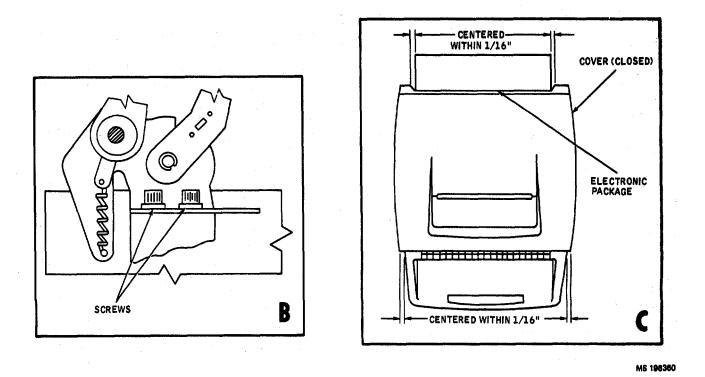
Printer Cover Hinge Rod and Bracket Adjustment (Sheet 2 of 2)
